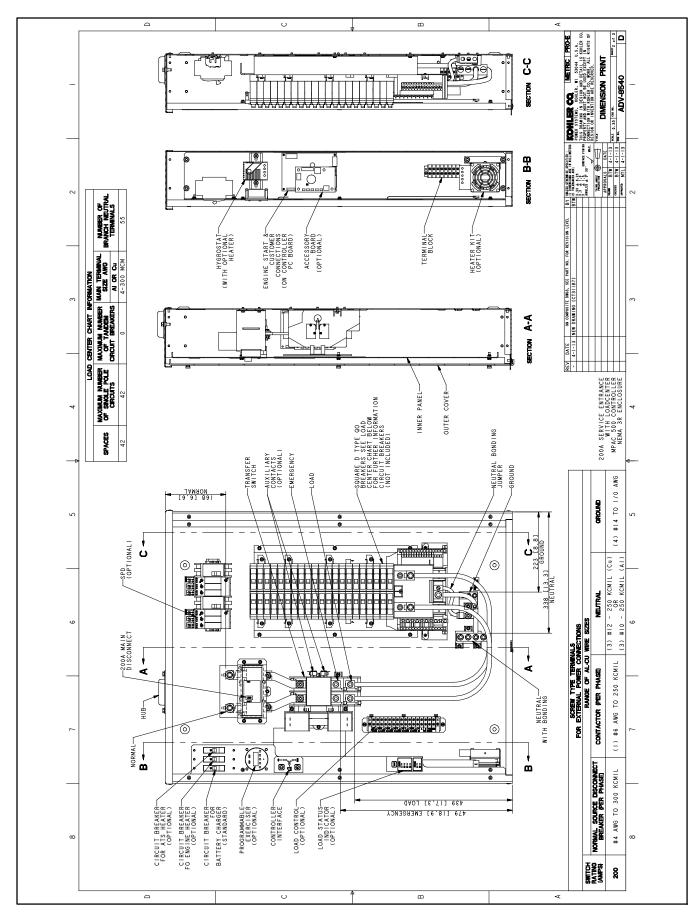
Dimension Drawing, 200 Amp Service Entrance Model with Load Center, ADV-8540, Sheet 2 of 3
